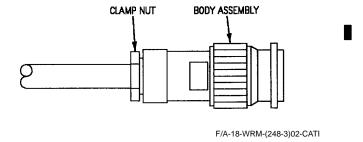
31-8473-5 (MIL-C-39012) Coax Connector Repair (Sheet 3)
